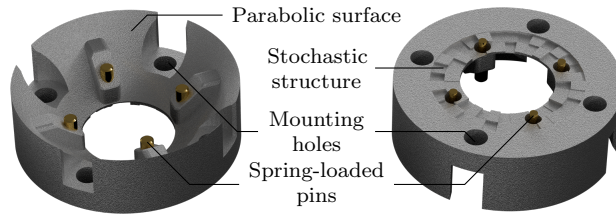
Upper and lower view of the model for the mounting ring with spring-loaded pins inserted.
